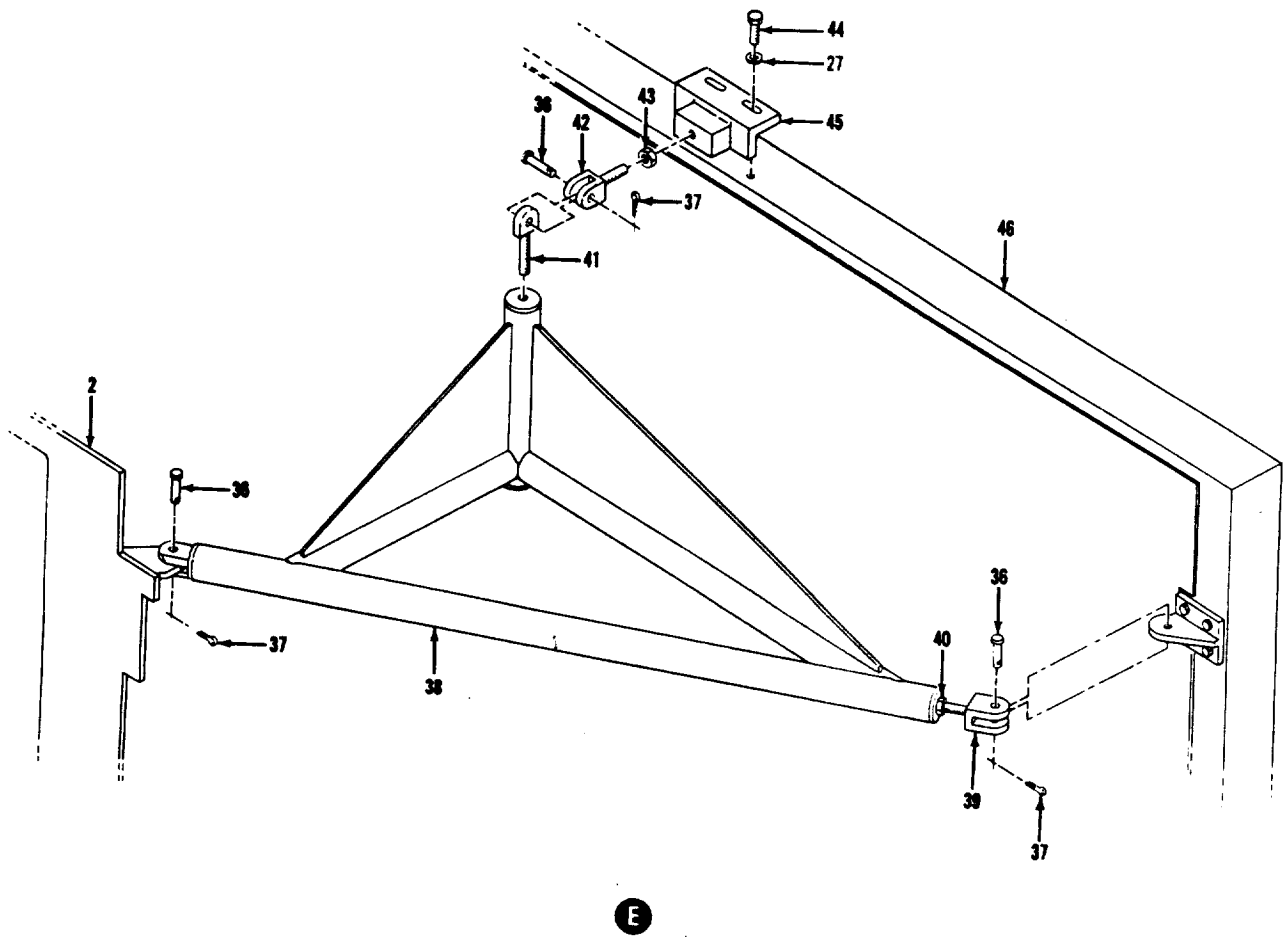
Extension Platform Assembly (Sheet 4 of 13)
